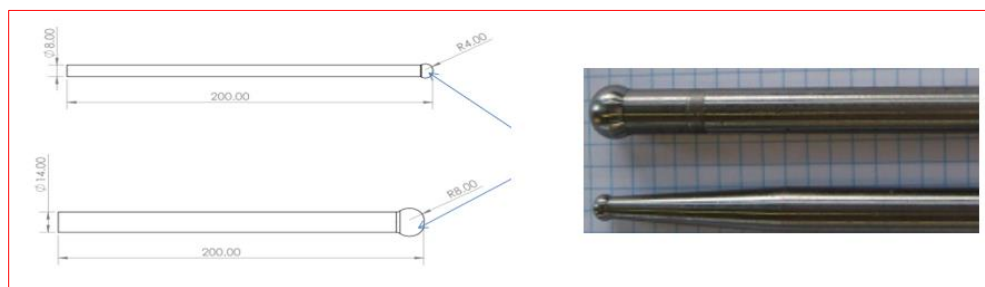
2 Hemispherical simple forming tool (a) Geometry (b) Pictorial view (All the dimensions are in millimeter).
